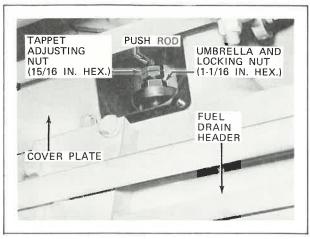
FUEL INJECTION PUMP TAPPET ROD ADJUSTMENT.
